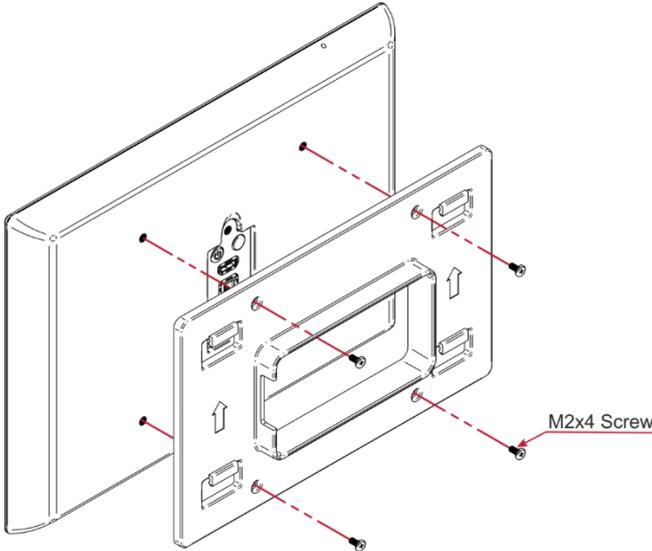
Attaching the Panel Mount Plate to the Rear Side of the KT-107S
